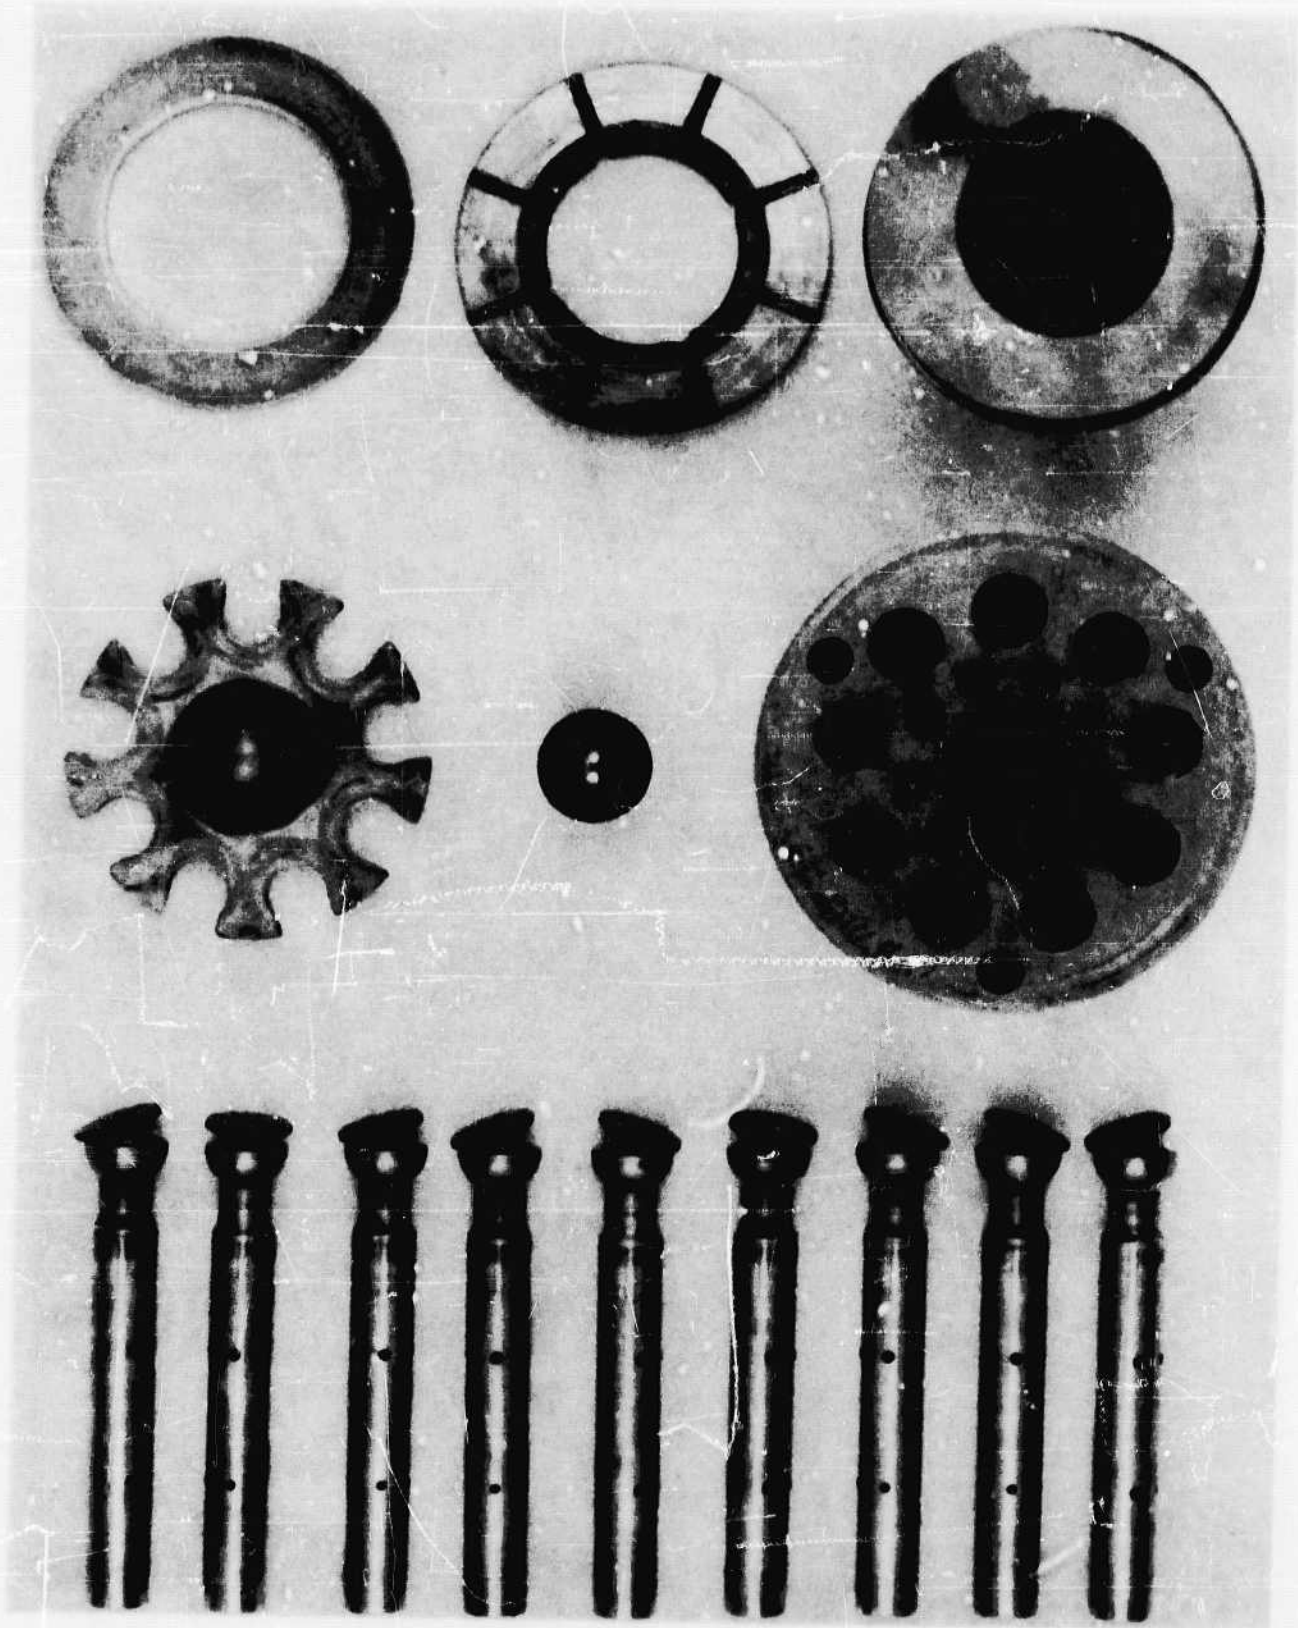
PUMP PARTS AFTER TEST NY-10
